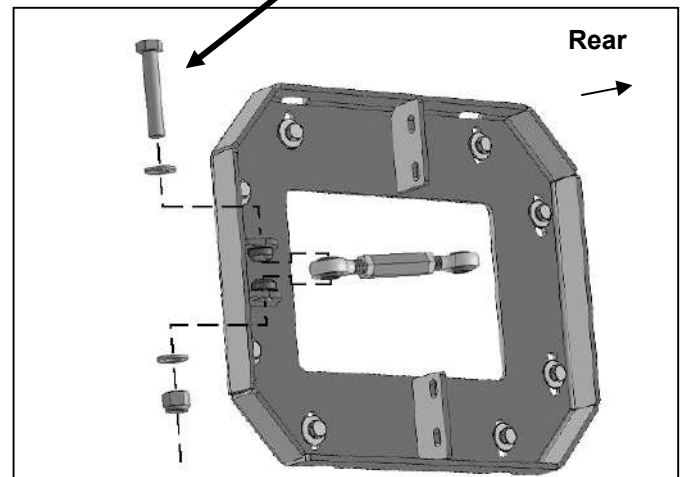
Insert (2) Rod End Spacers into the holes in the tabs on the Tailgate Mount
